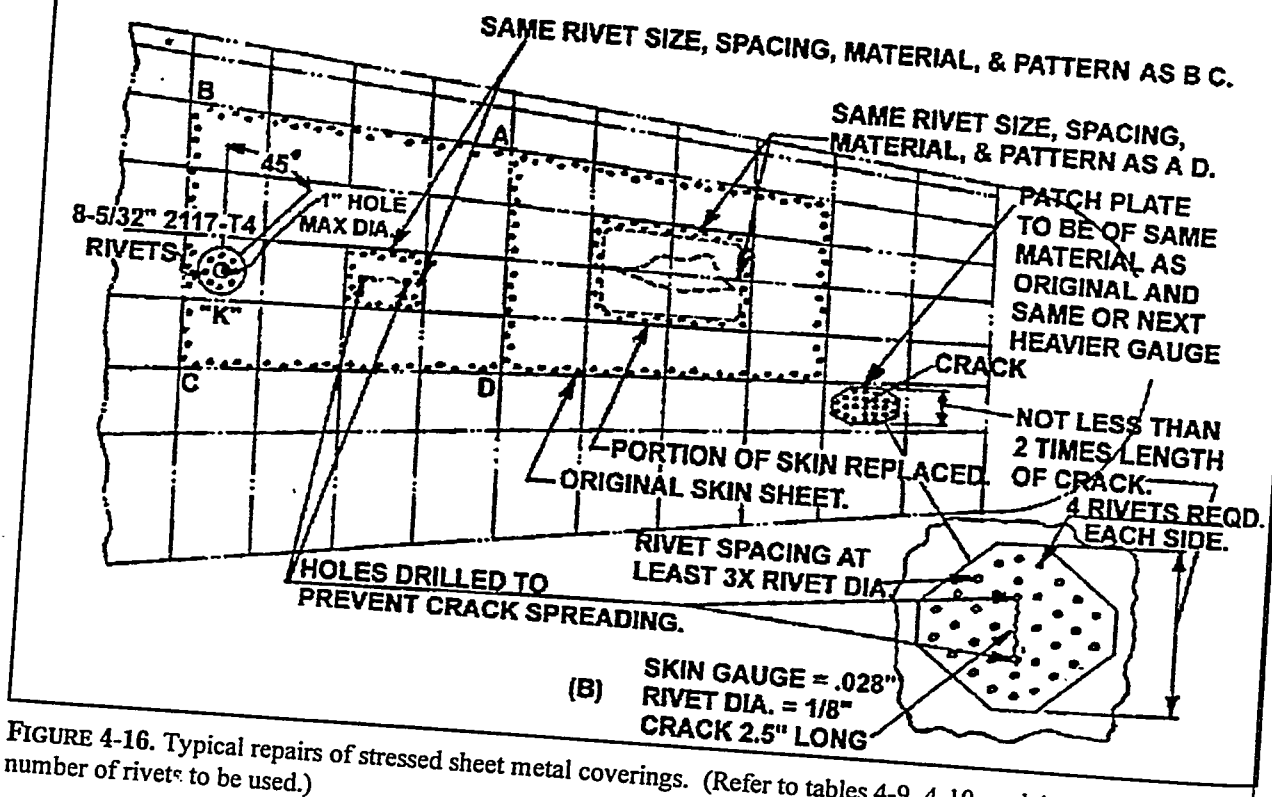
Typical repairs of stressed sheet metal coverings. (Refer to tables 4-9, 4-10, and 4-11 to calculate number of rivets to be used.)
